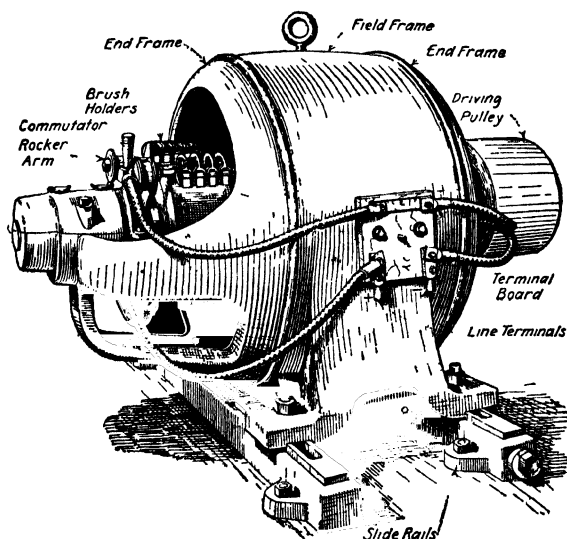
Assembly view of a small direct-current, compound-wound generator. A disassembled view of the same machine is shown in Fig. 308 (*Allis-Chalmers Manufacturing Company*)
